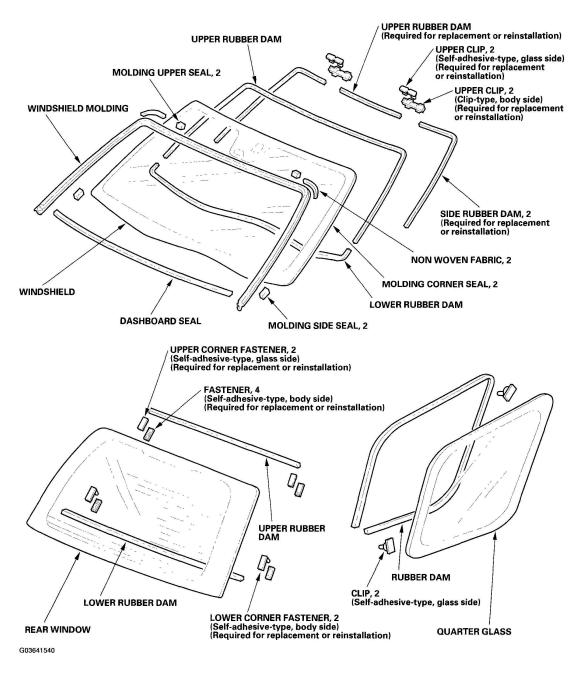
Identifying Glass Components Location Courtesy of AMERICAN HONDA MOTOR CO., INC.
